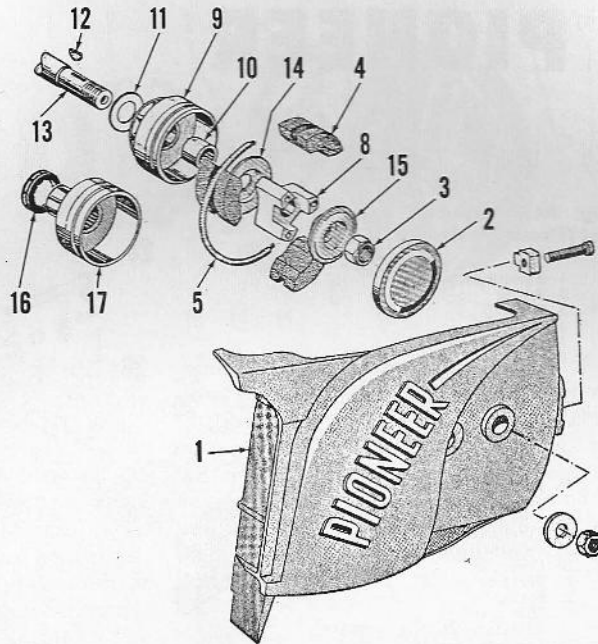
The outer end of rewind spring should be located between lugs on air box. Hooking end over outside lug may break the lug off.
